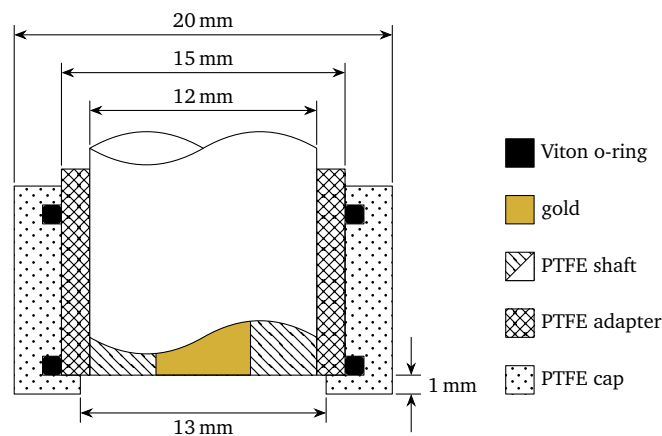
Cross-sectional drawing of the recessed gold RDE fitted with the PTFE adapter and cap.
